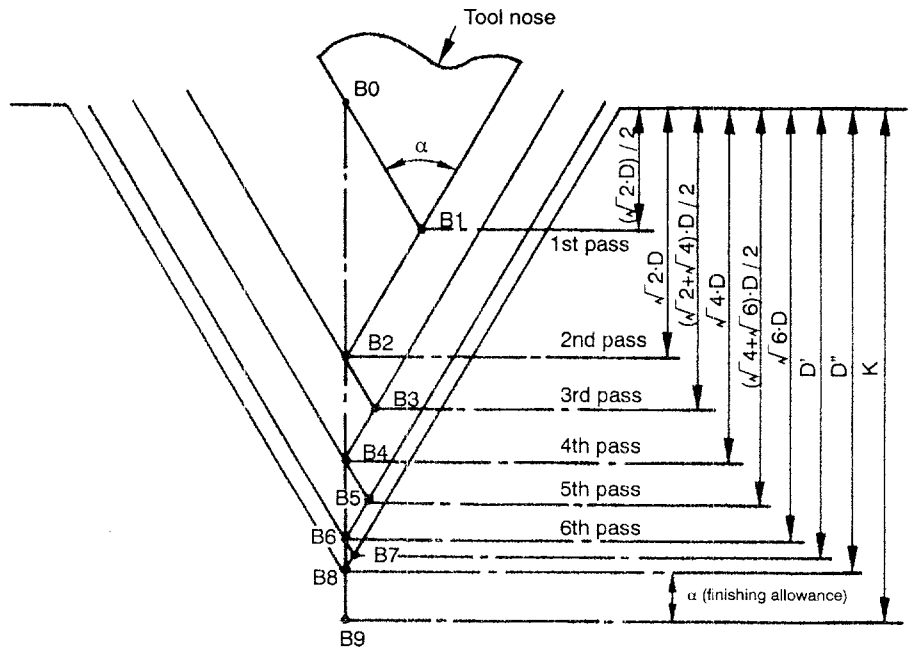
Constant Metal Removal Amount, Zig-zag In-feed Mode Thread Cutting
